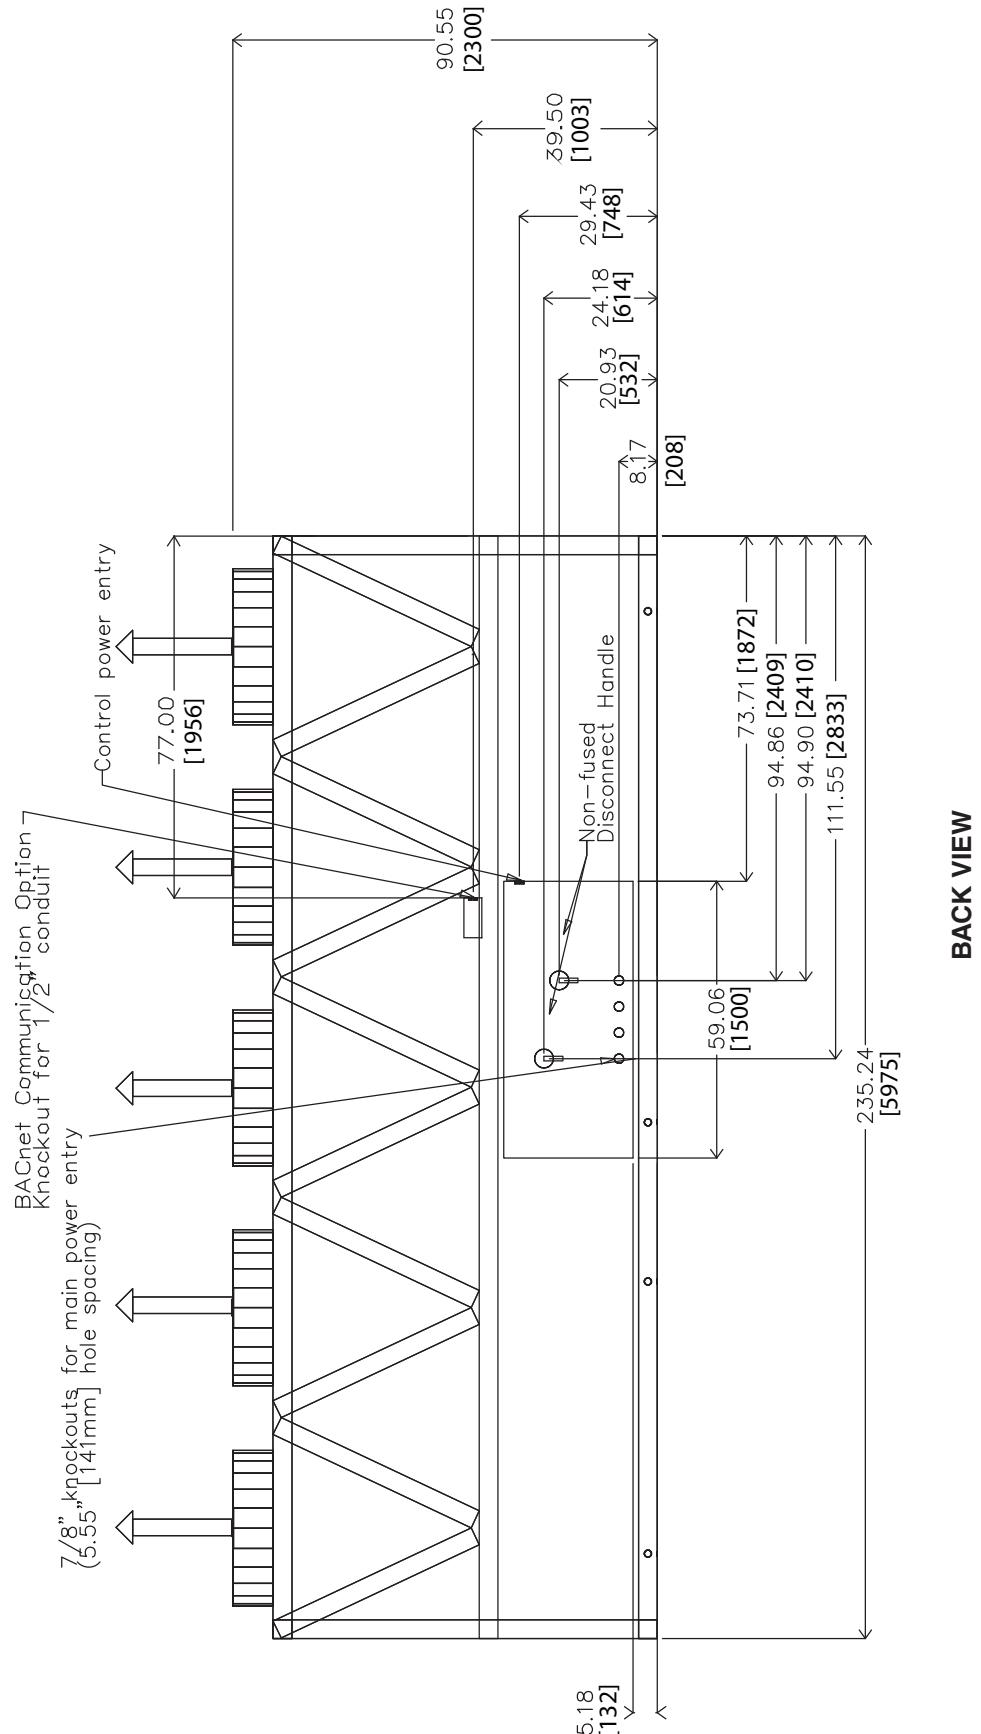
30XA140,160 Air-Cooled Liquid Chiller Dimensions with Pump (cont)
